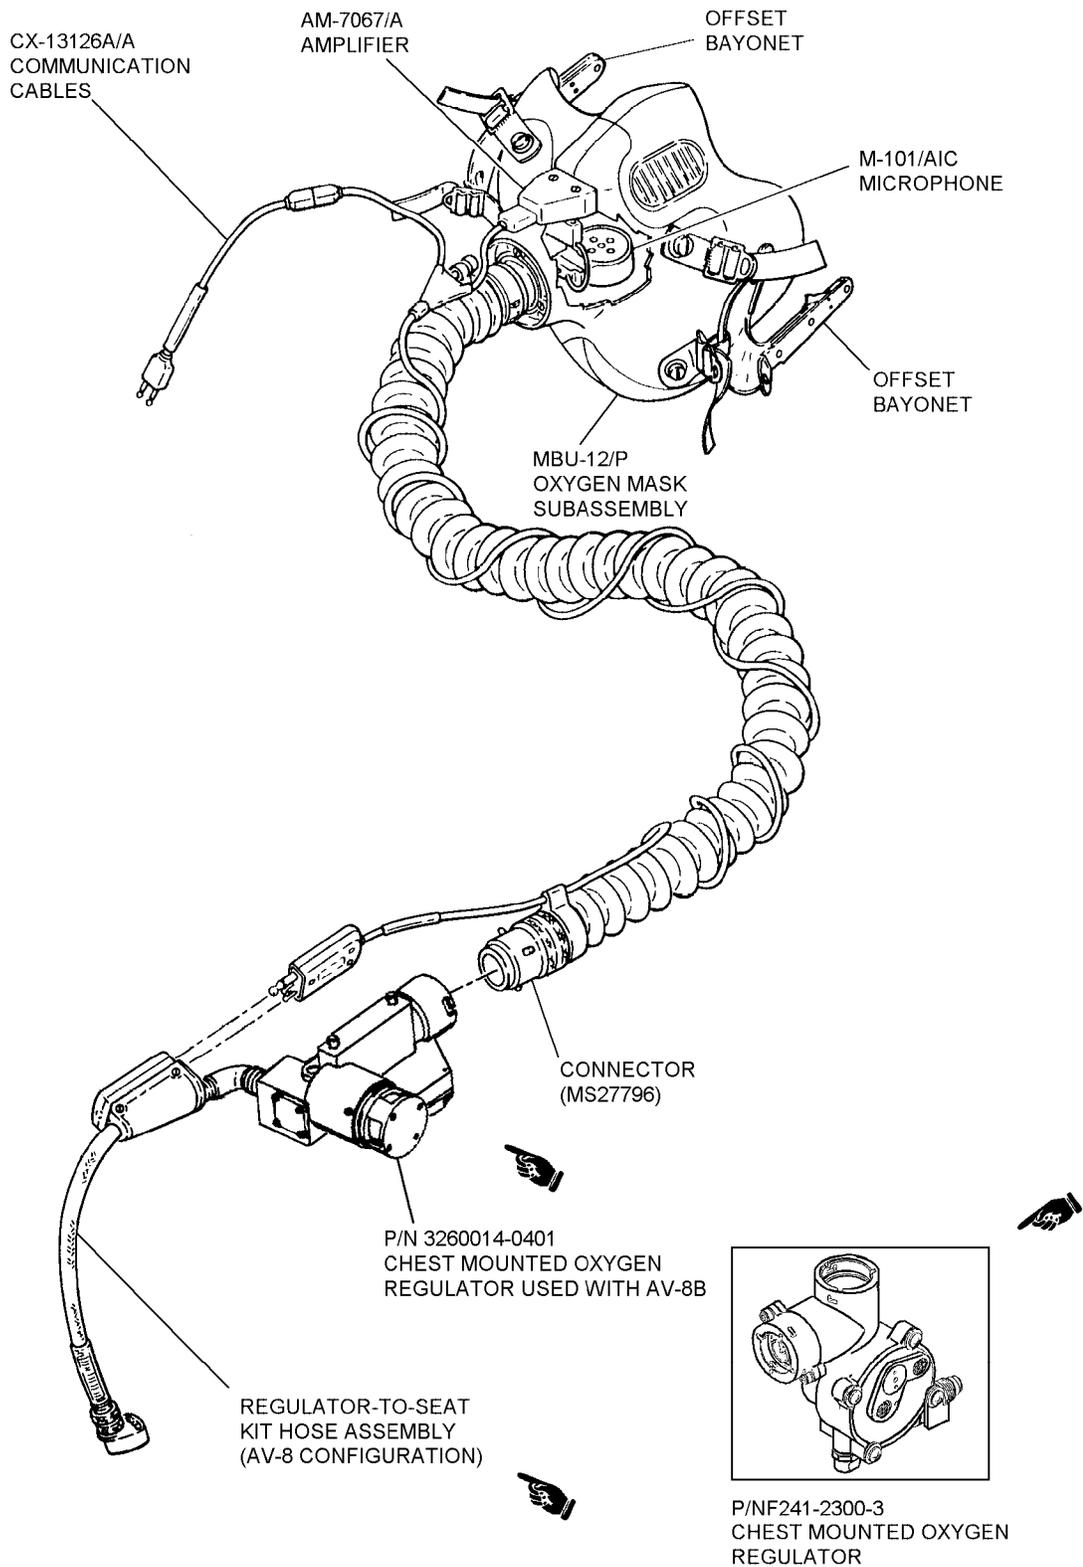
MBU-16/P Oxygen Mask Assembly (AV-8 Series and F/A-18 Aircraft)
